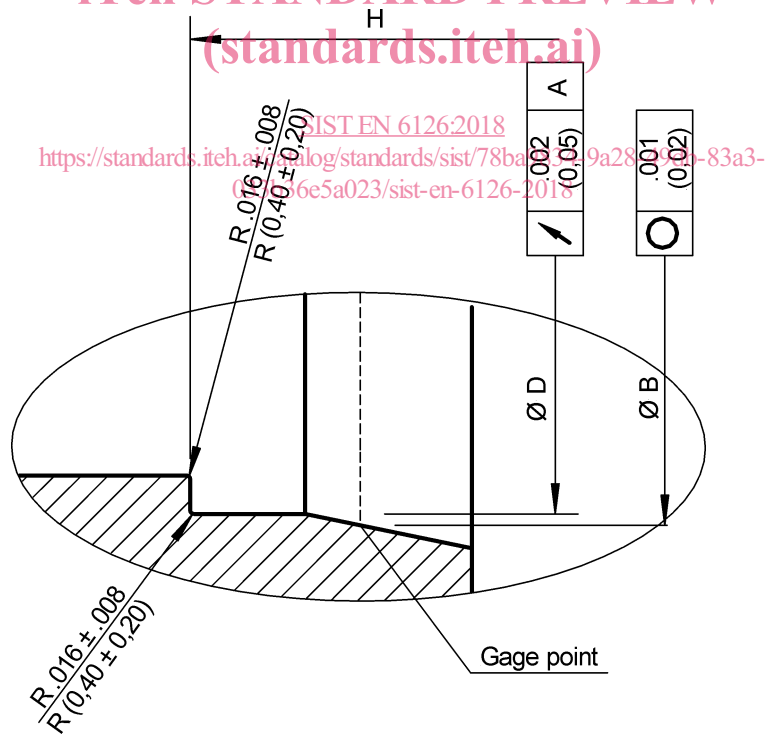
Configuration, dimensions and tolerances of fitting end design, optional style F
